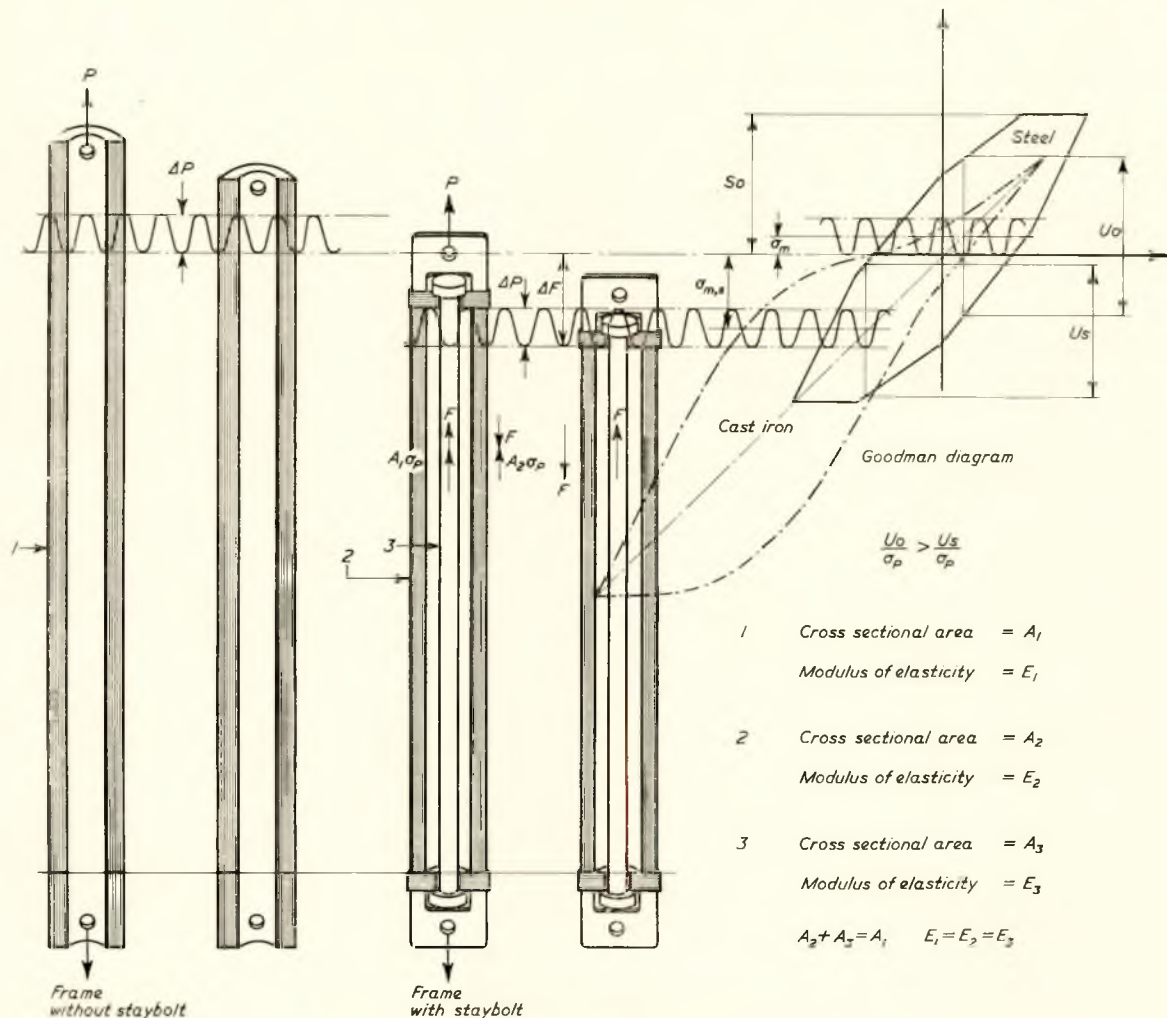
Forces and stresses in simplified engine frames, with and without stay bolts
